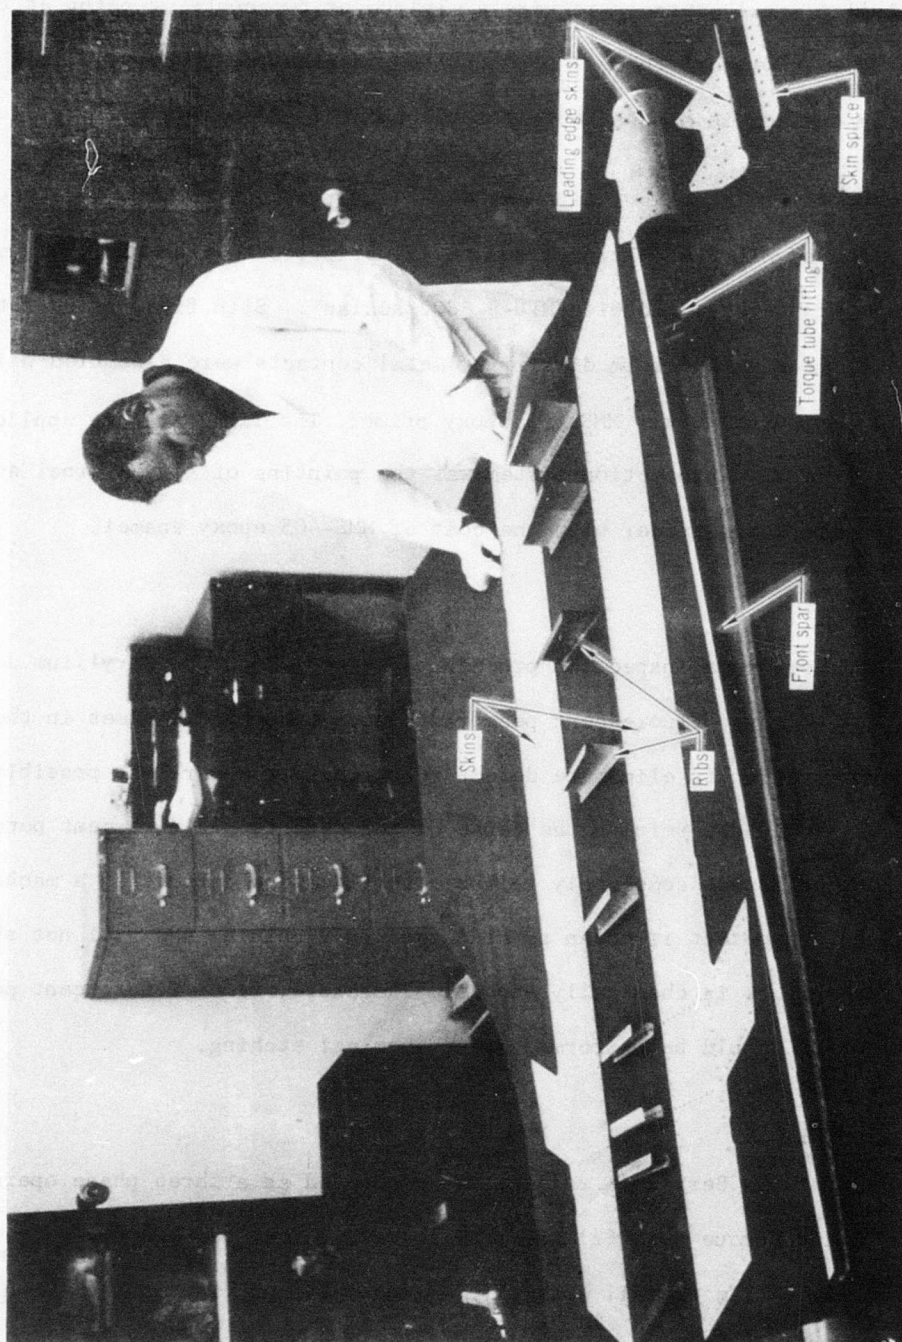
Rudder Front Torque Box Beryllium Detail Parts
